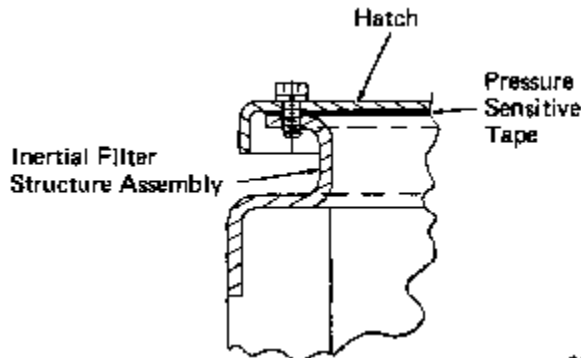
Cutaway of Pressure Sensitive Tape Application Between Hatch-To-Inertial Filter Structure Assembly
